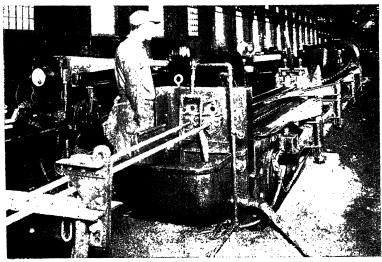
Cold-drawing operation. (Bethlehem Steel Co.)
